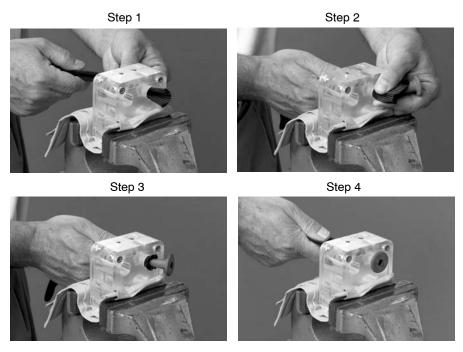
Pinch Valve Installation (Pump Valve Body Shown, Procedure is Same)
